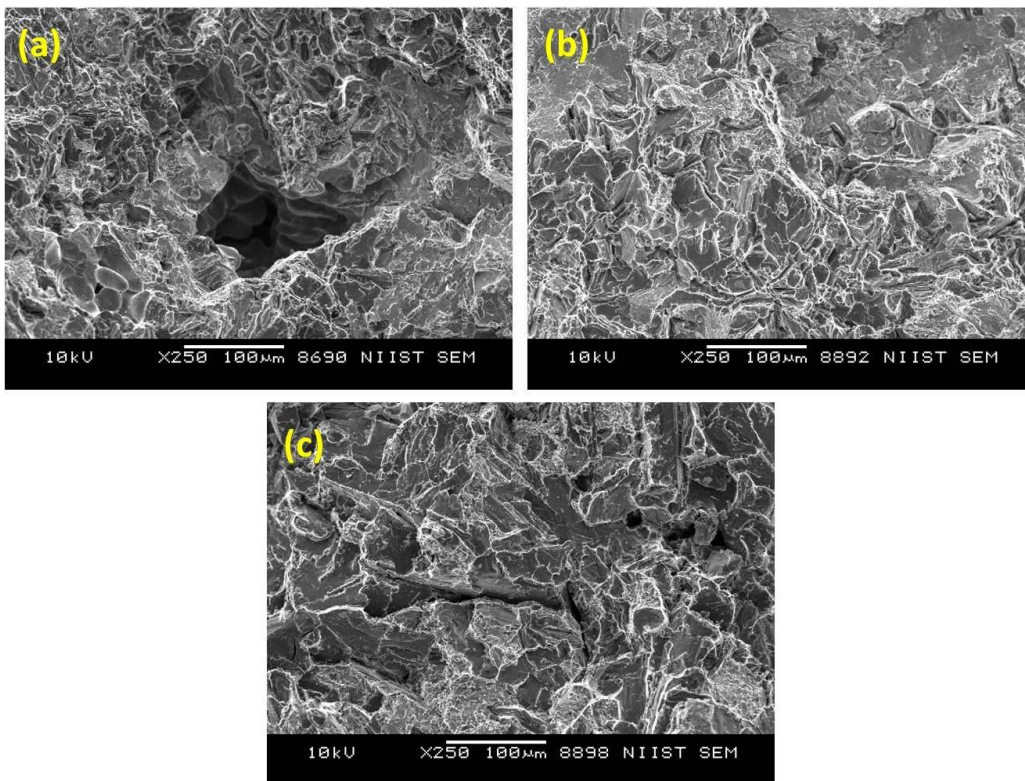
SEM analysis of fracture surface of A390-0.03 wt. % Zr (a) outer specimen (b) middle specimen and (c) inner specimen
